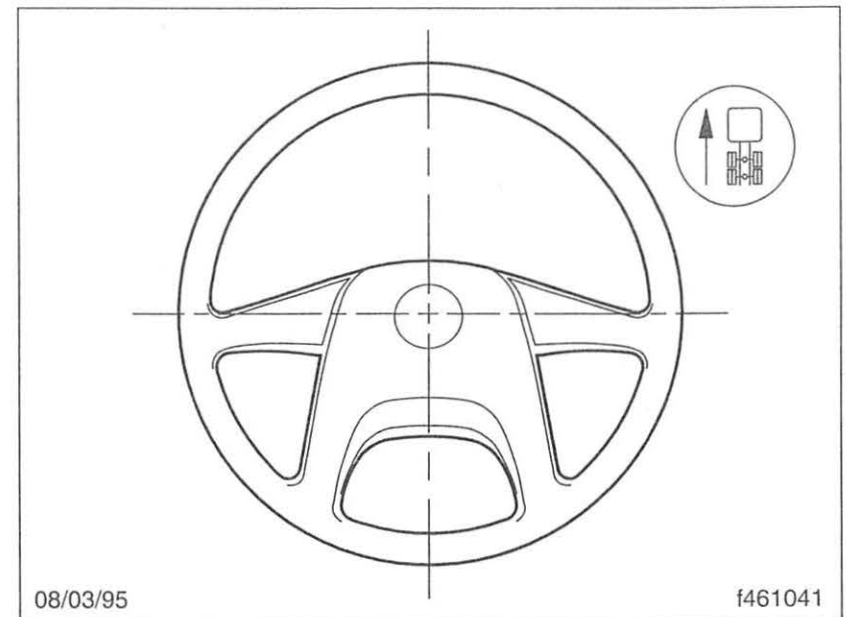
, Proper Steering Wheel Position (with tires pointed straight ahead)
